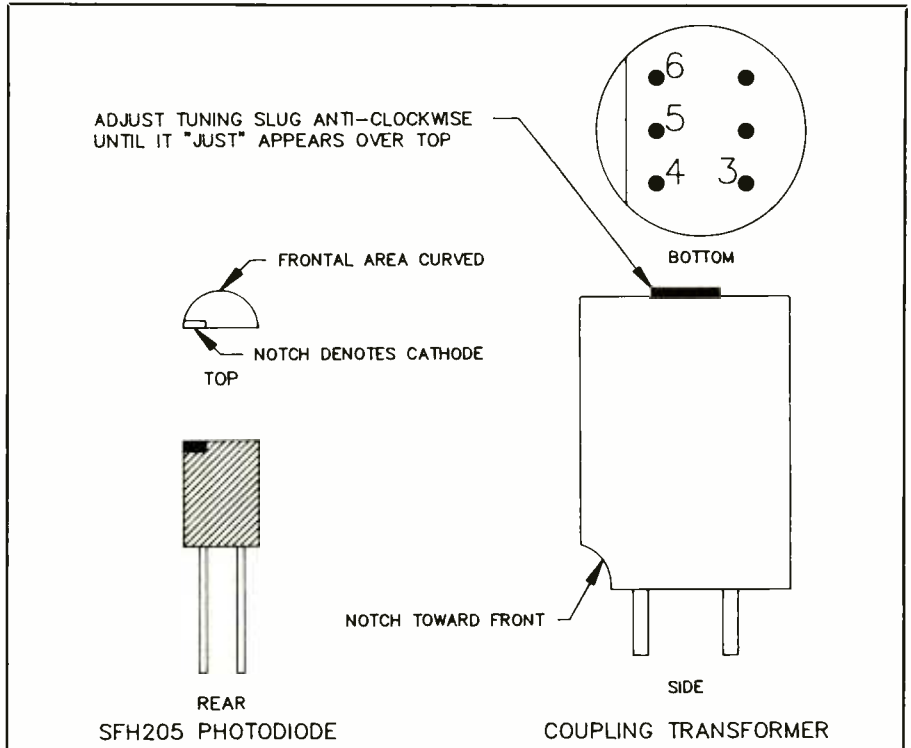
Physical details for photodiode and coupling transformer. Refer to these drawings when installing these devices on the circuit-board assembly.
